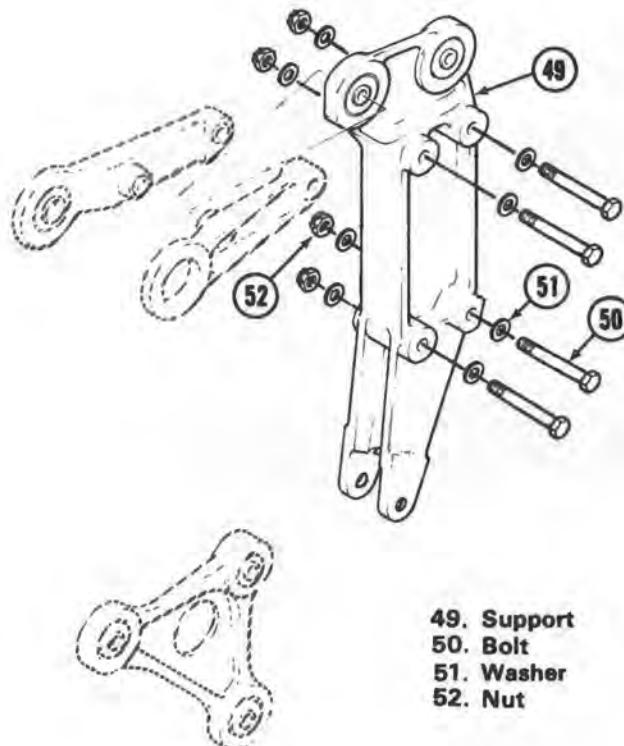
Tail rotor control system (bellcranks, levers, supports, and tubes) — removal and installation
